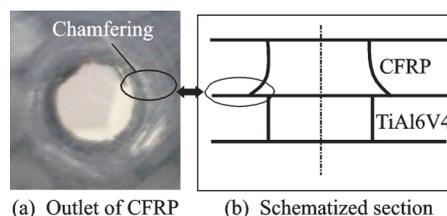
Microscope photograph of outlet of CFRP and schematized section of stacks after chamfering^[46]
